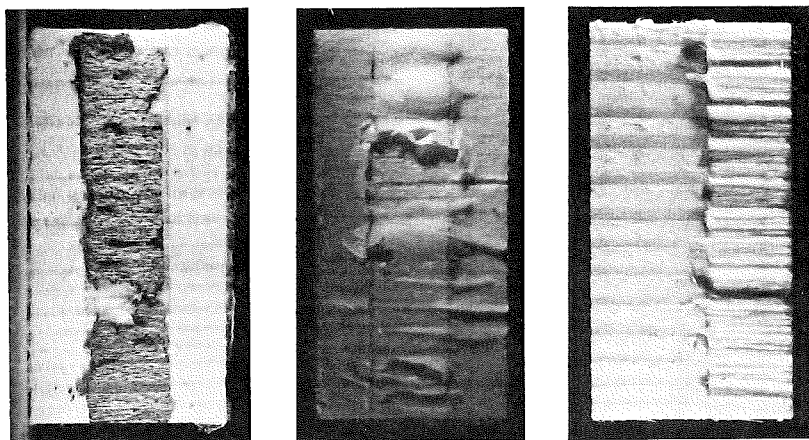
Fracture surfaces of R/P, PVAc and wood specimens.
